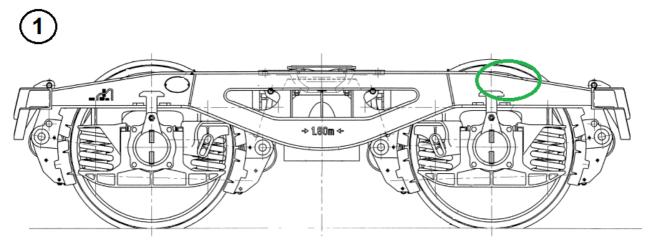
View of the bogie at railcar end 1 from the side with the assembly site marked
